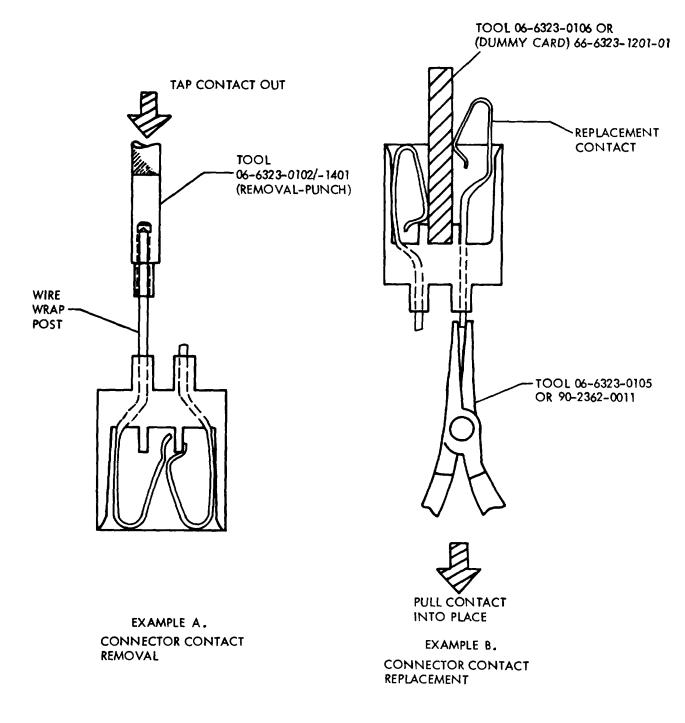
Card Cage Connector Contact Removal and Replacement.
